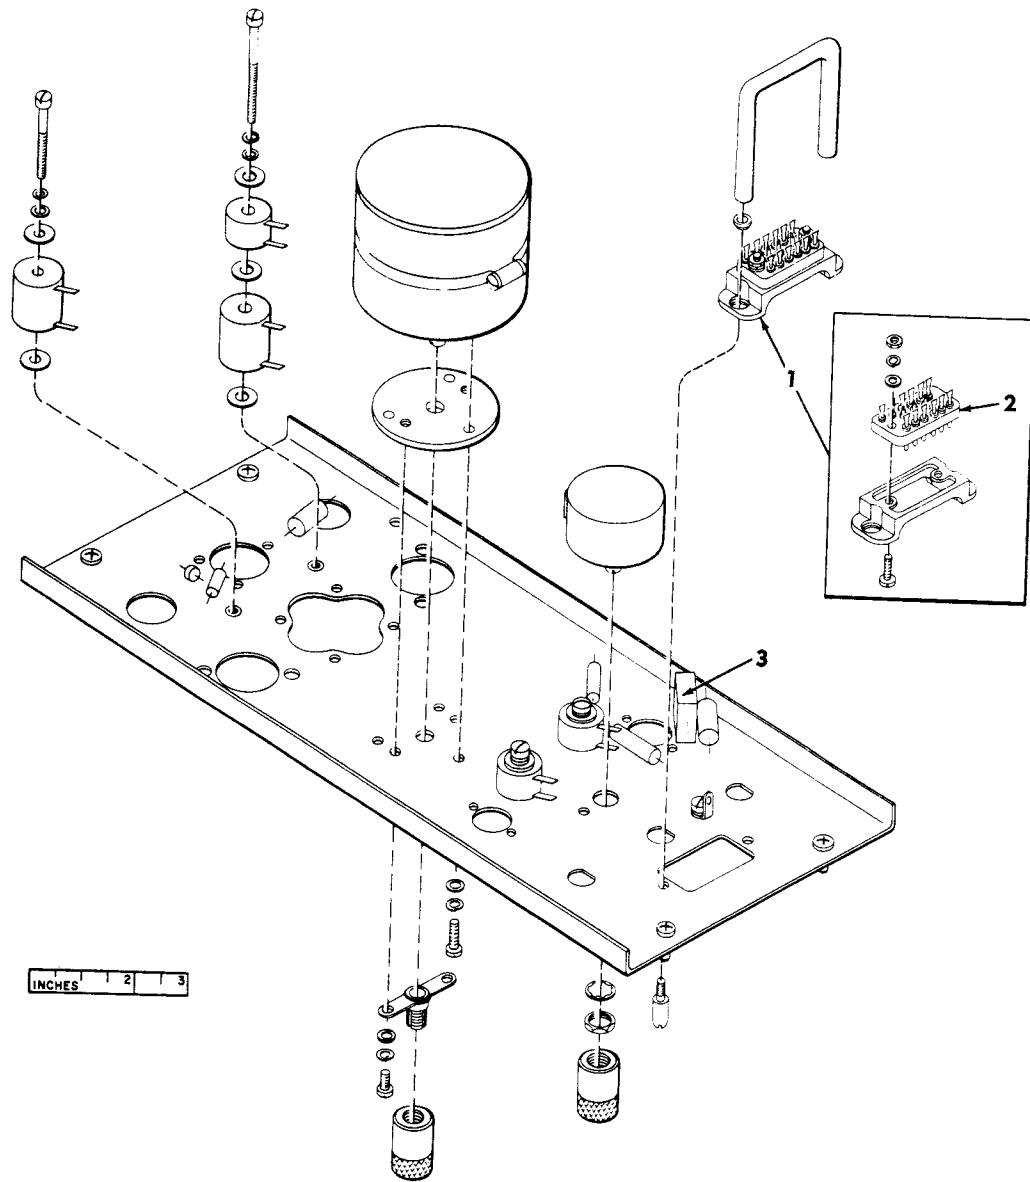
Relay, amplifier assembly (9995581)—exploded view
